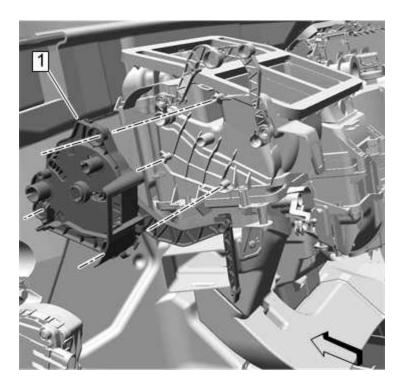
Mode Control Cam Courtesy of GENERAL MOTORS COMPANY
